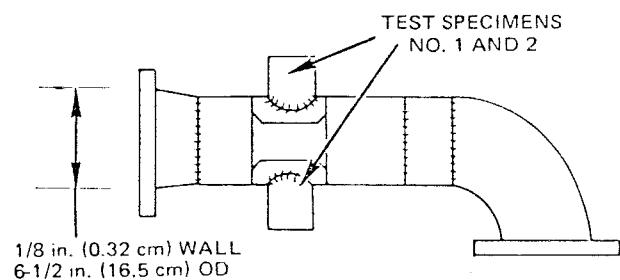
Type 321 stainless steel boss-to-pipe welds.
